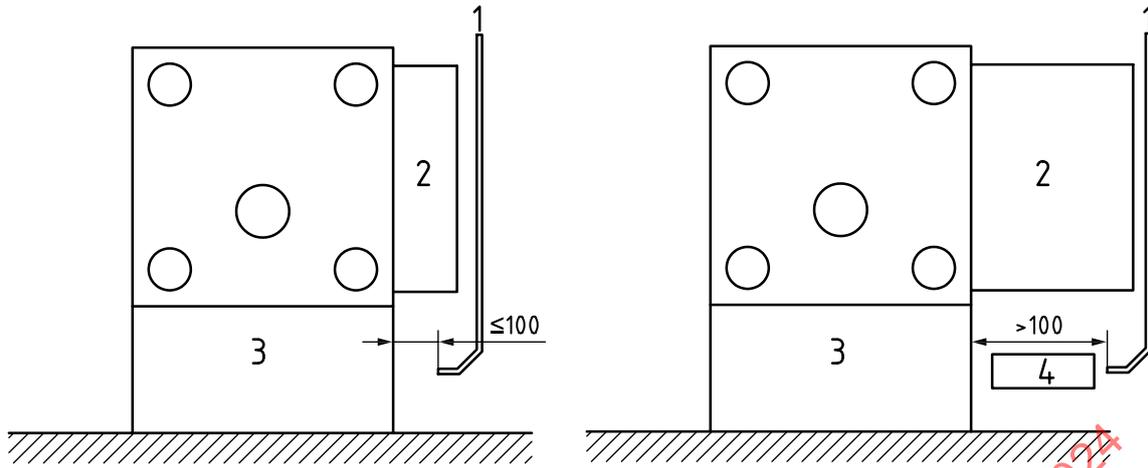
Examples of danger zones for metal spraying at horizontal cold-chamber die casting machines
